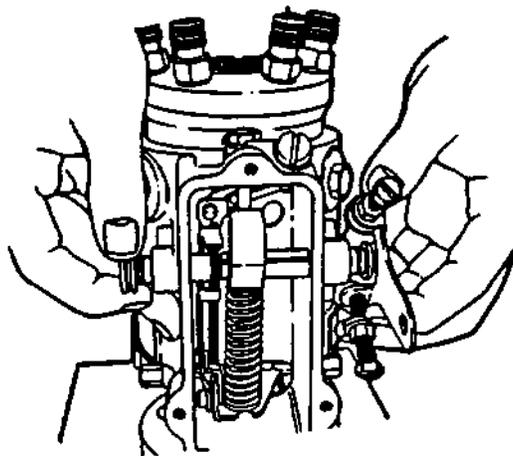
Installing Throttle Shaft Assembly (Typical)
